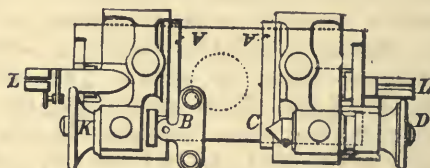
TOP VIEW OF COMBINATION CHUCK FOR MILLING APPLIANCE.
